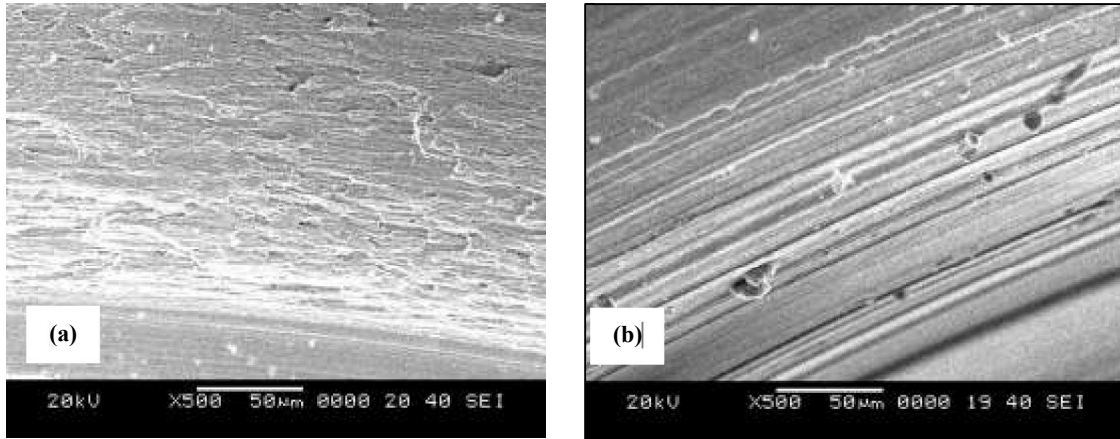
Fracture Surface Morphology (a) Threaded Pin Tool, (b) Simple Pin Tool
